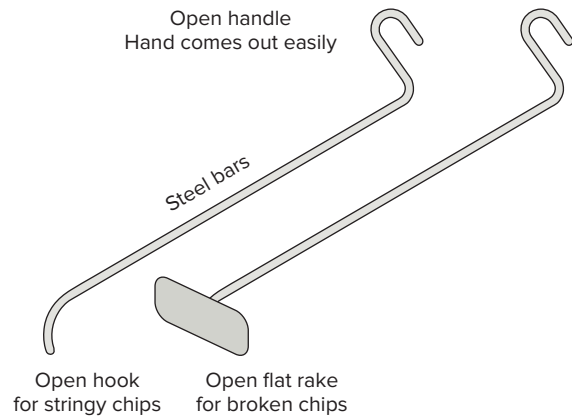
Chip hooks and chip rakes feature open handles designed to not get caught in moving machinery.
